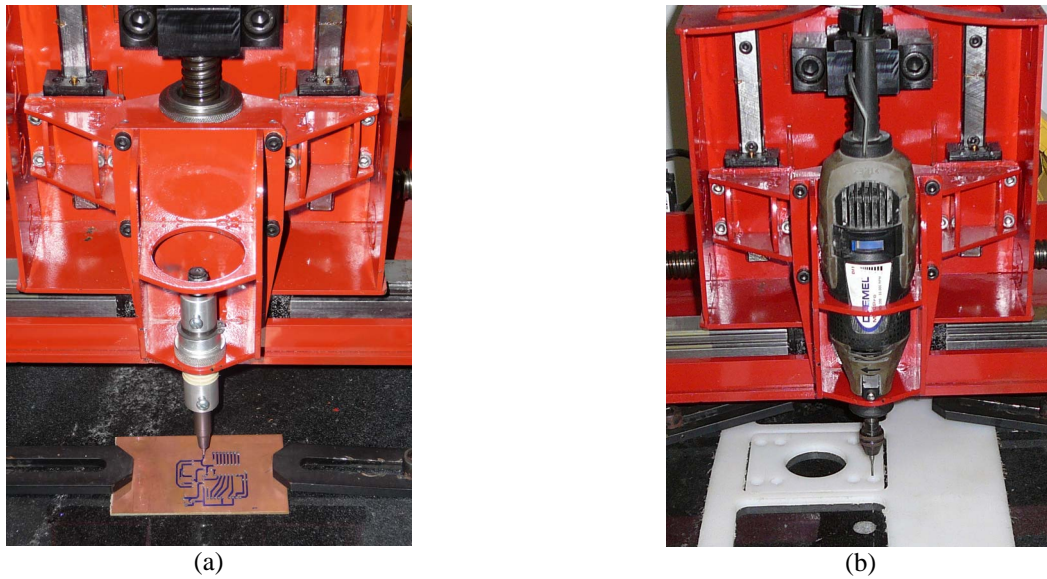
Tool holder with pen on a spring loaded support (a), and with the DREMEL tool (b).
